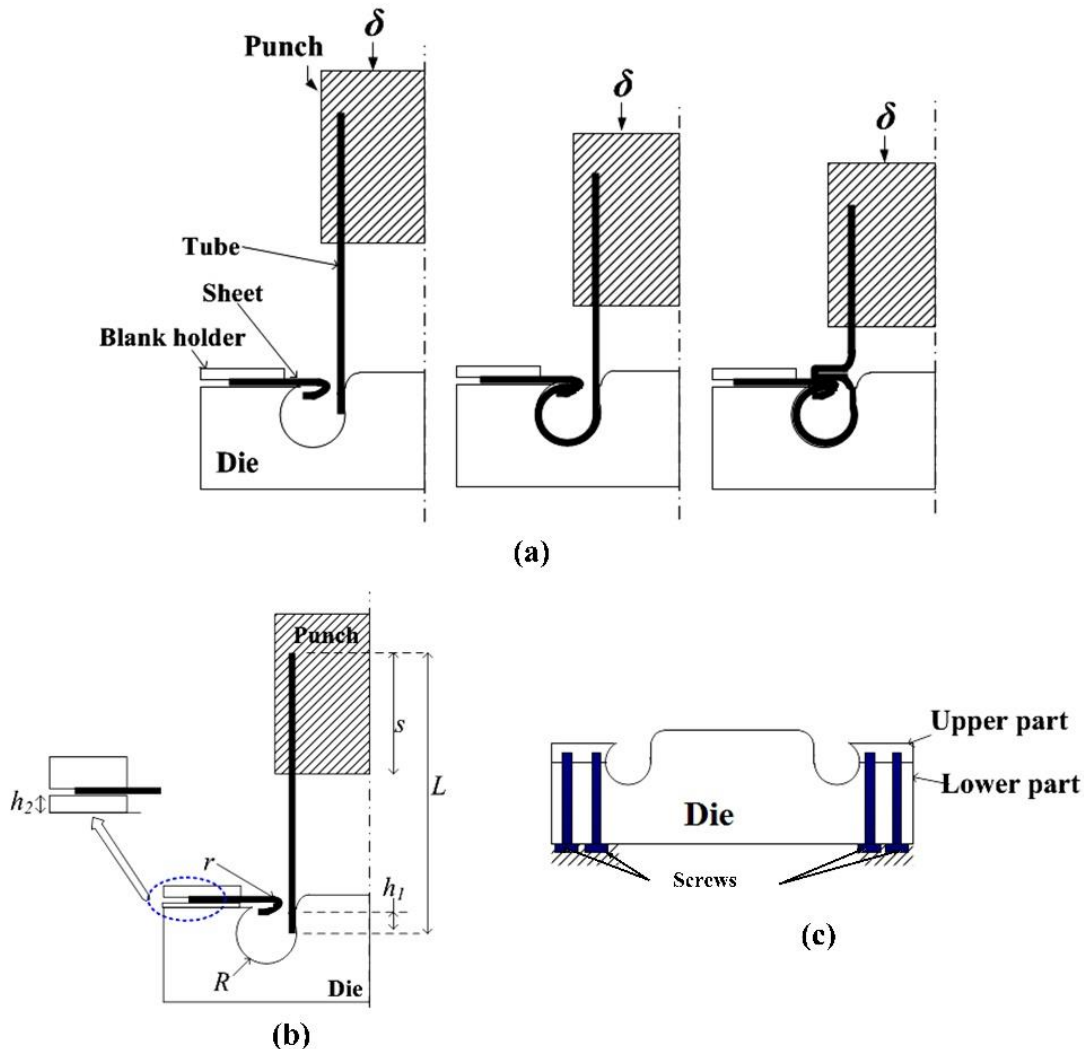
Joining a tube to a sheet using end curling, (a) schematic of the proposed method, (b) parameter definitions, (c) split die for tube end curling (not to scale)
